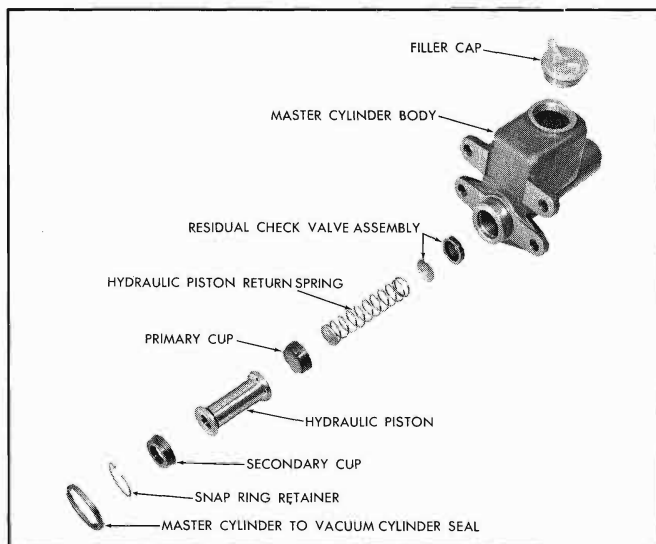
B-13 Master Cylinder Assembly—Exploded View
